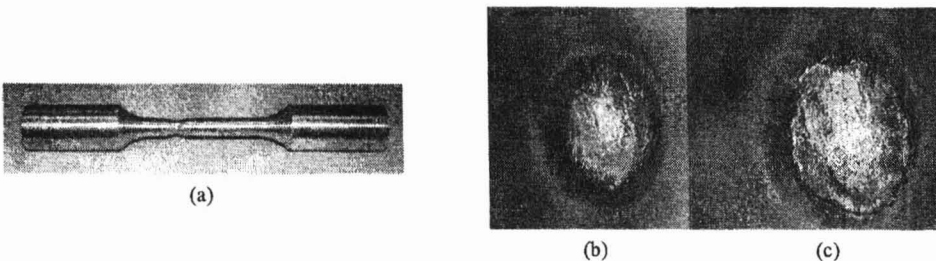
Round Dumb-bell of as Extruded Specimen Tensile Test. (a) Necking Immediately Prior to Fracture. Photograph of Typical Ductile Fractured using Stereo Microscope (b) Cup and (c) Cone Shape.
